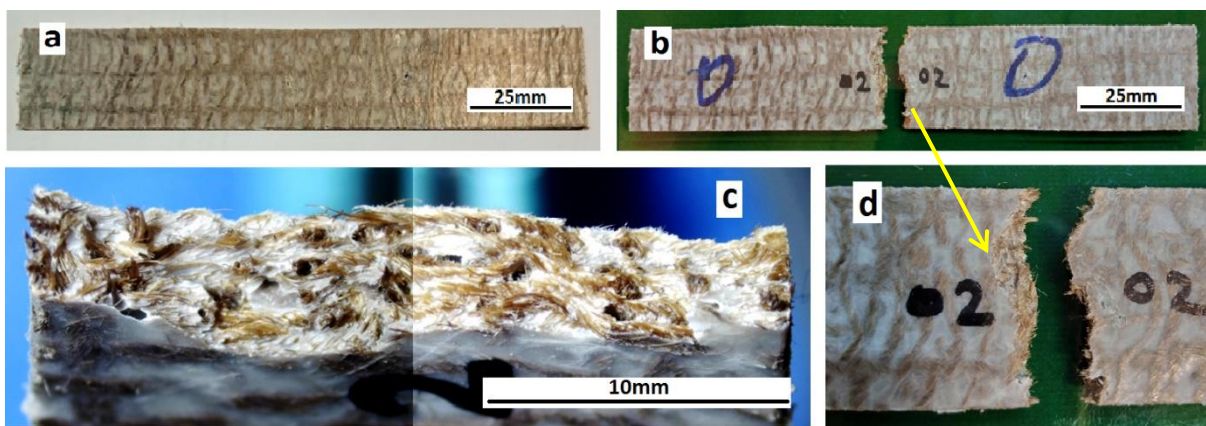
Microscopic image of 3D orthogonal tensile tested specimens in warp direction (a) tensile specimen before testing, (b) tensile specimen after testing, (c) zoomed perspective view broken edge, (d) zoomed top view of broken counterparts
